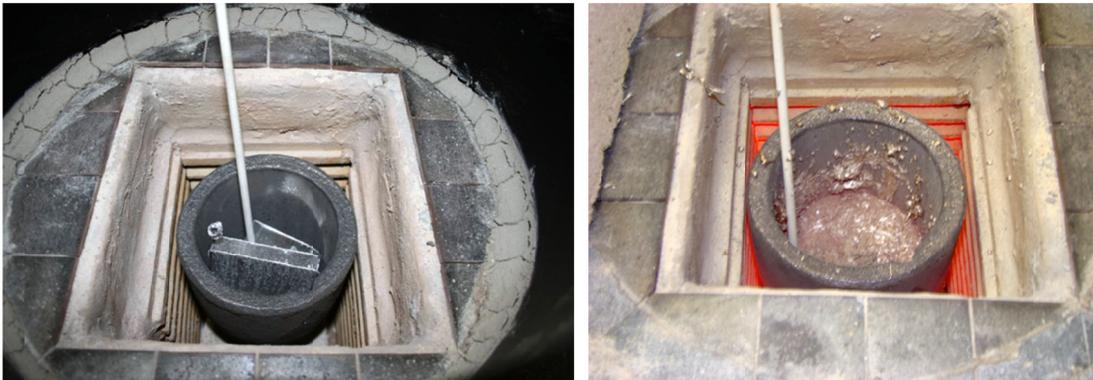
The clay crucible used for the hot dip aluminising as placed in the furnace before and after melting of the aluminium.
